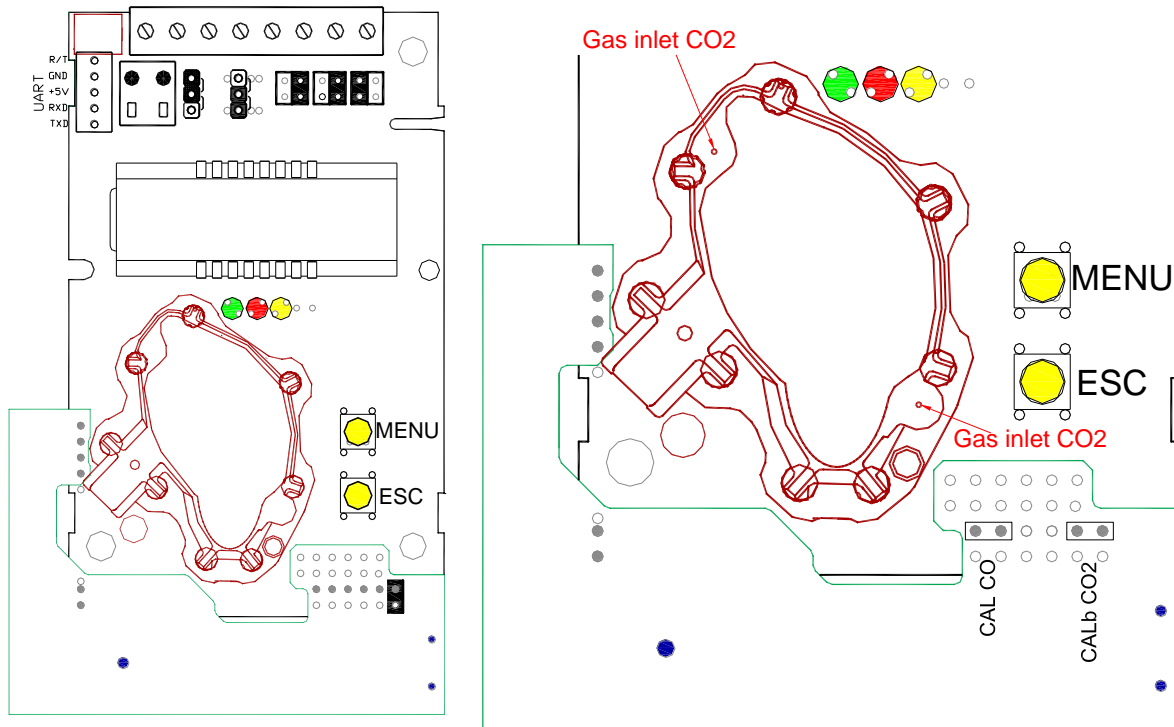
The PCB with the calibration jumper in default position. An enlarged part of the PCB with marked gas inlets and jumper positions for calibration is shown at right.
